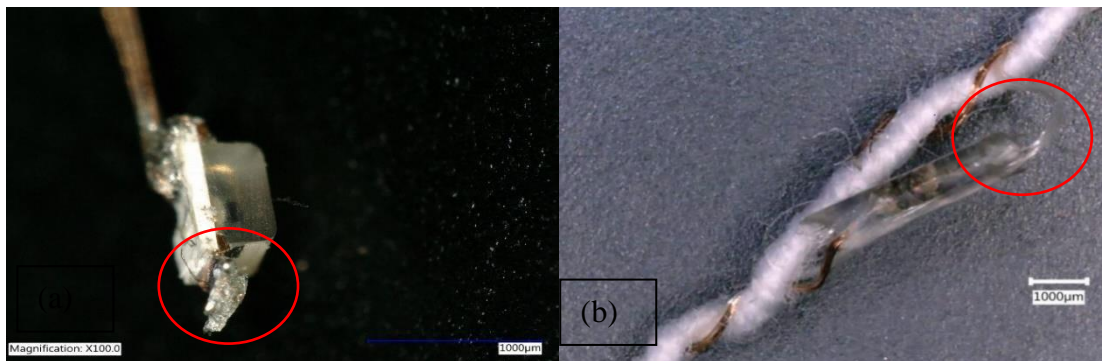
Failure mode of soldered LED under tension. (a) The debonding of solder pads on a component under axial loads of bare soldered components. (b) The copper wire is broken at the interface between the micro-pod and the wire from a complete EFY.
